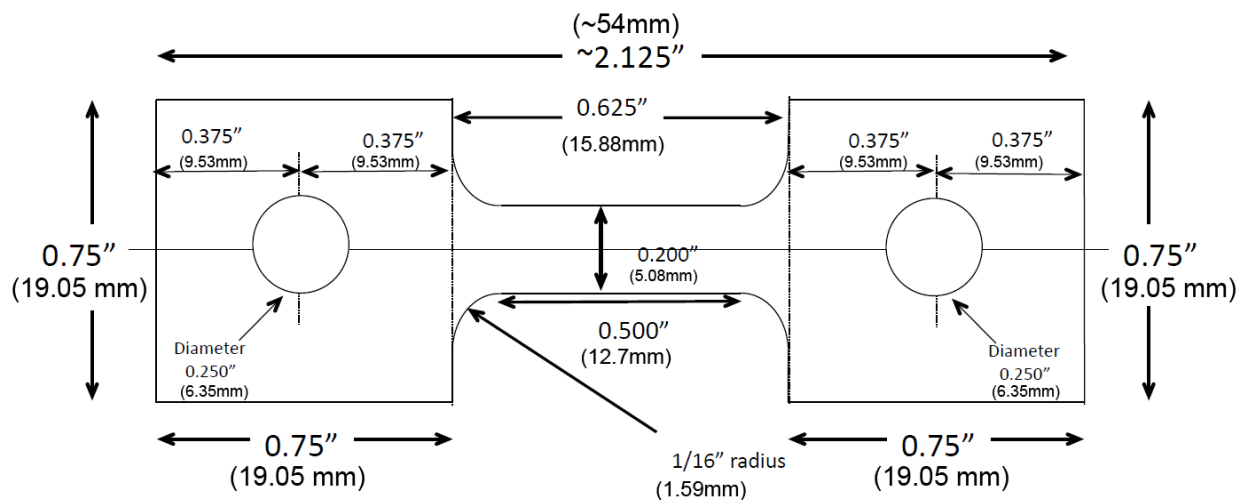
Drawing of the tensile specimen used to conduct the mechanical testing.
